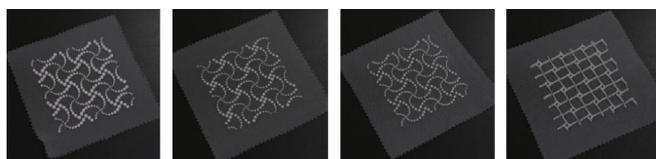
Final 3D-printed textile samples fabricated using TPU via FDM printing.
